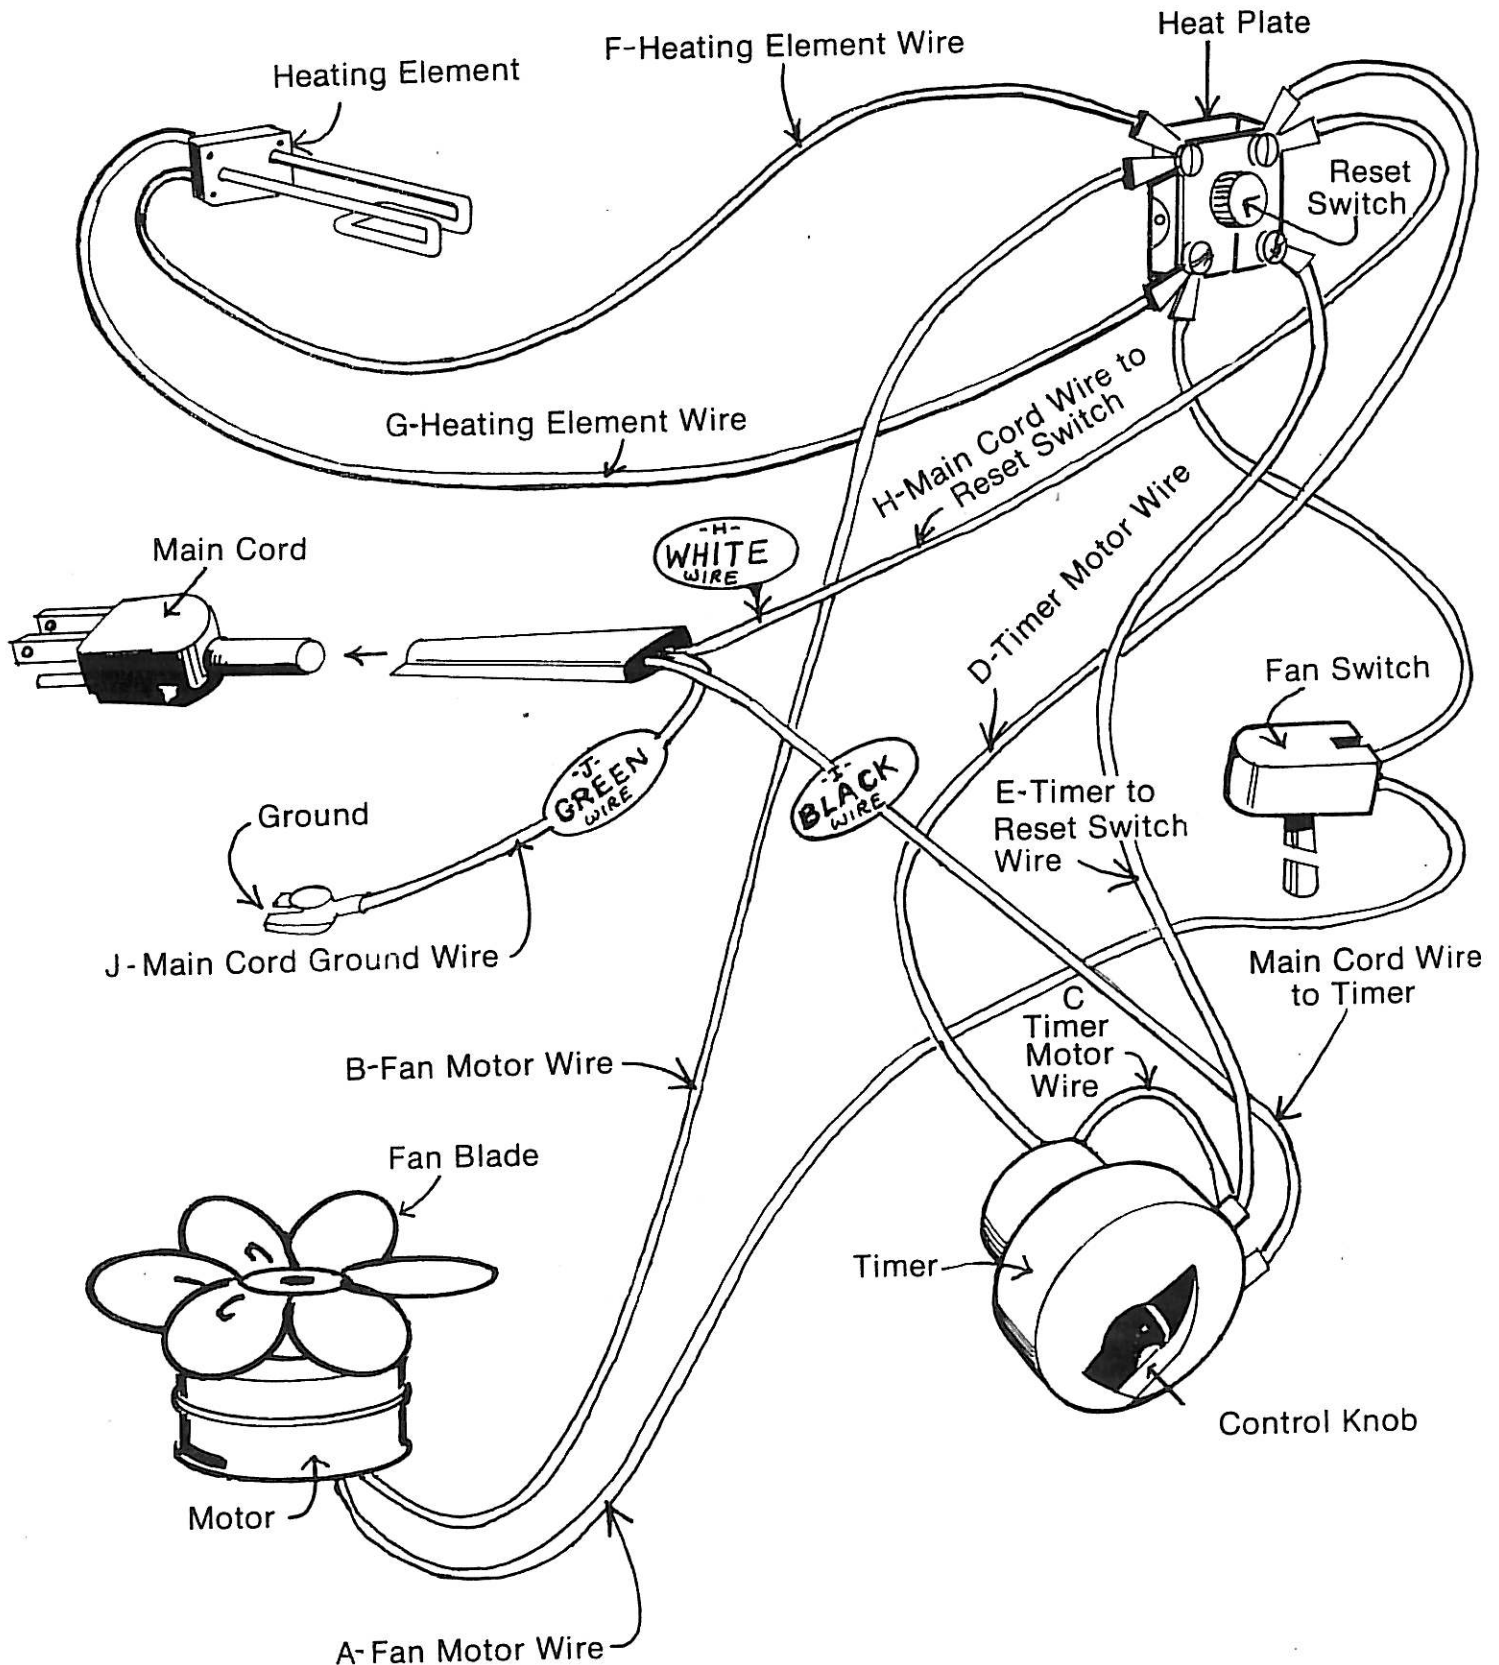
REAR VIEW OF UNIT COVER REMOVED
